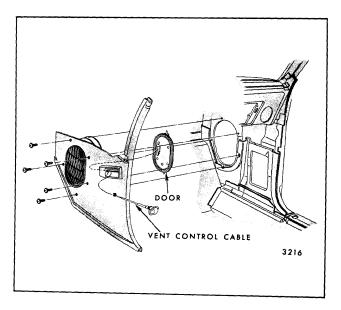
Shroud Side Finishing Panel - "F" Styles
